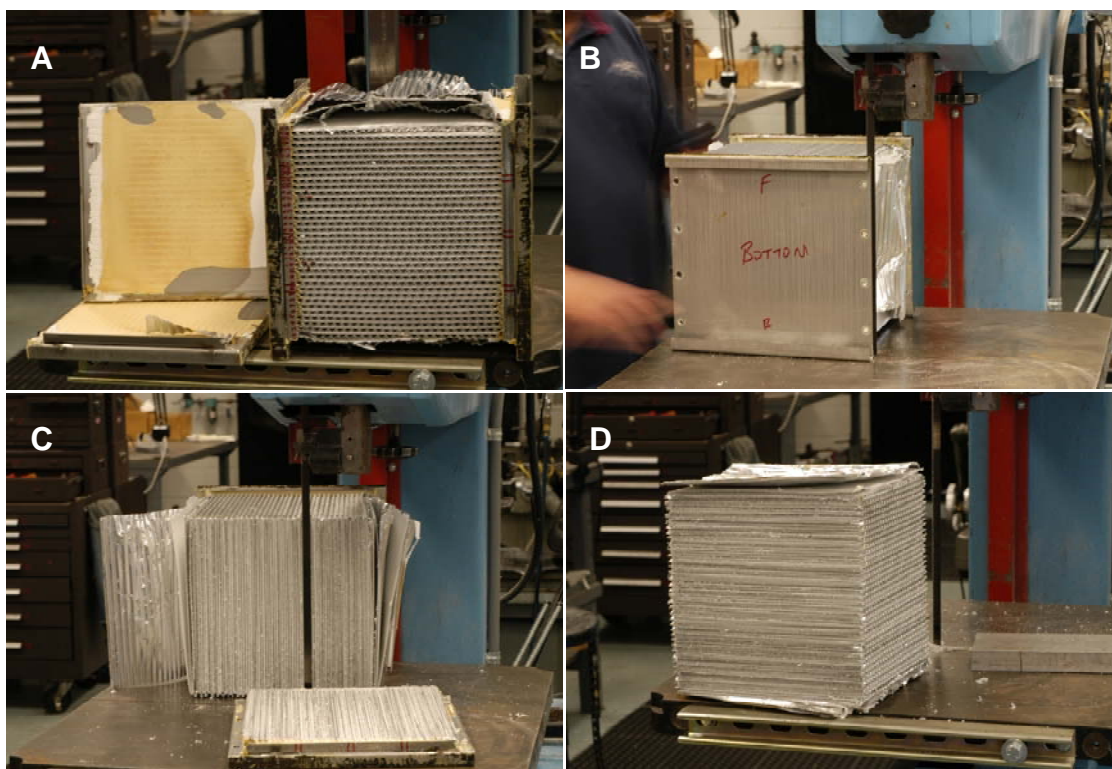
A: Removal of sides of housing. B: Cutting away bottom of housing. C: Filter after bottom of housing is removed. D. Filter pack after housing is removed.
